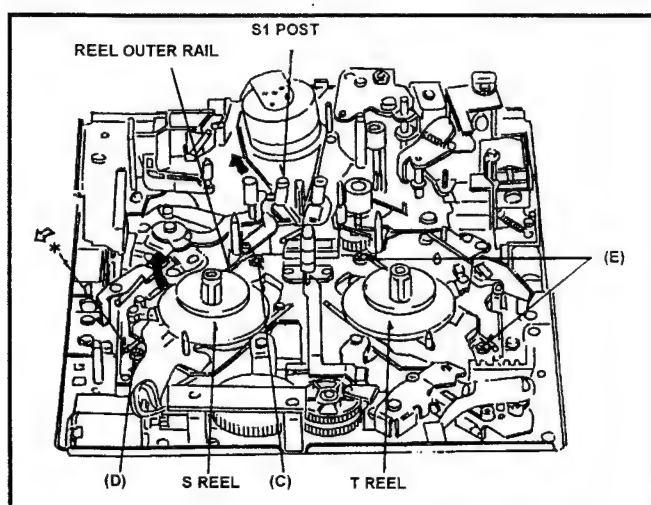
Removal of S & T Reel Rotor Unit
